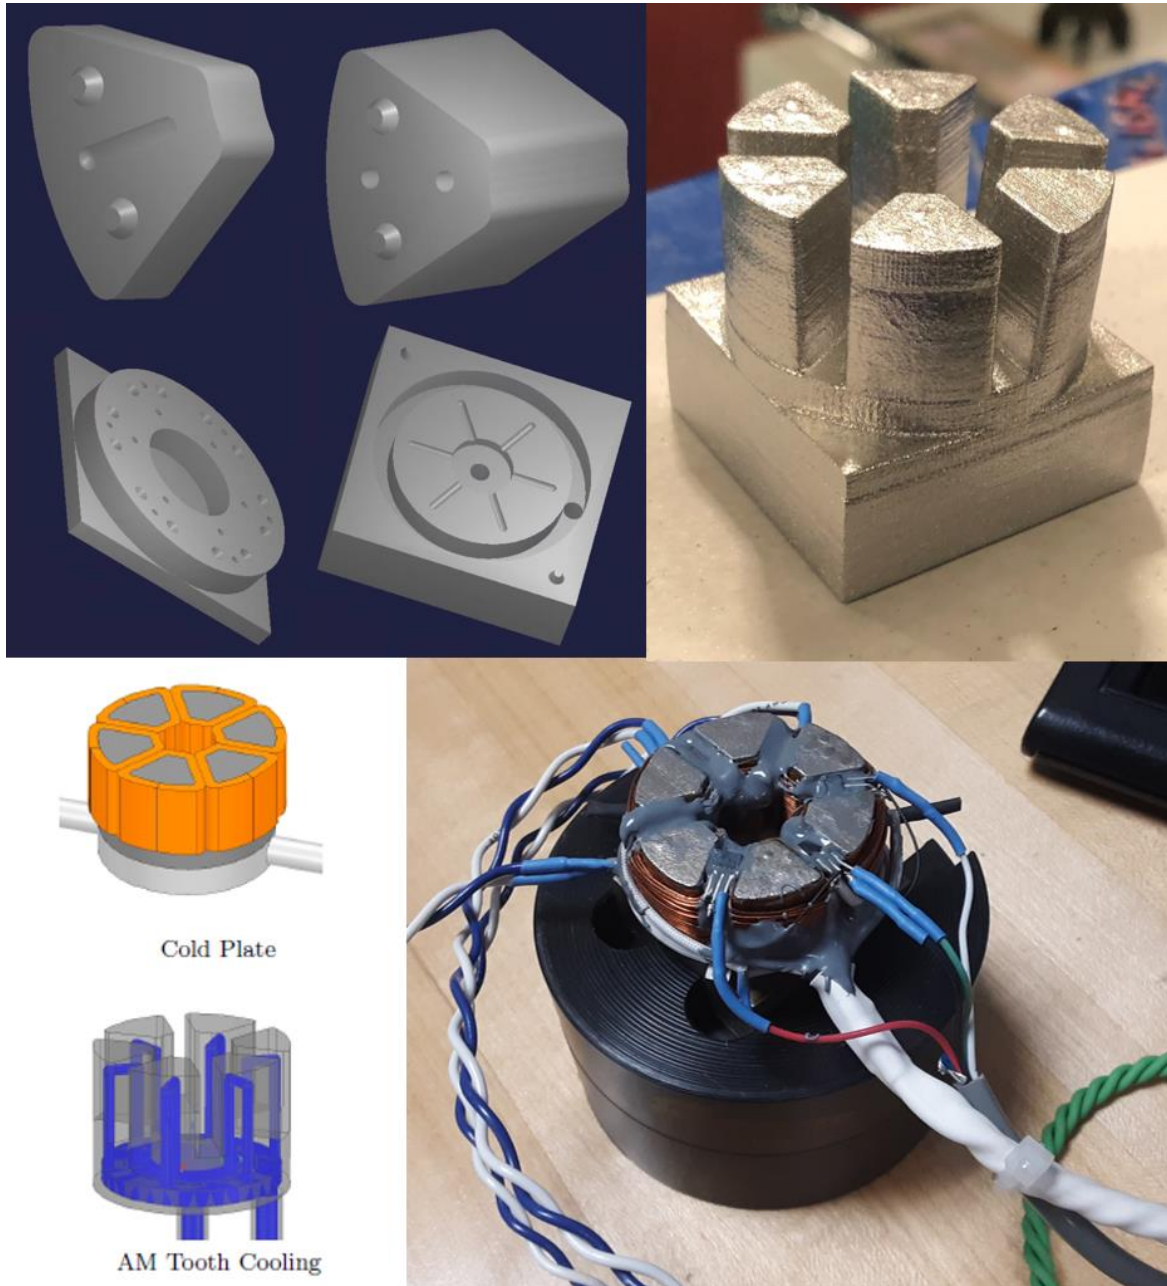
The CAD files of different parts of the stator core (top left) and the final sintered part with using the joining technique (top right). The perspective view of internal cooling channels (bottom left), an illustration of the test setup of the stator with windings (bottom right)
